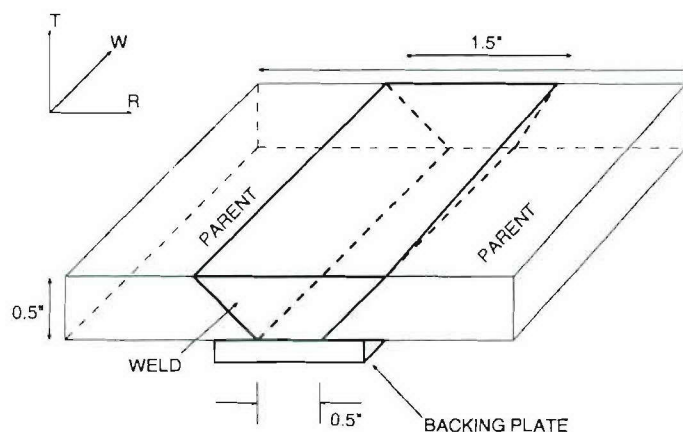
Stainless steel welded plate P_C : Design of the welded joint.
